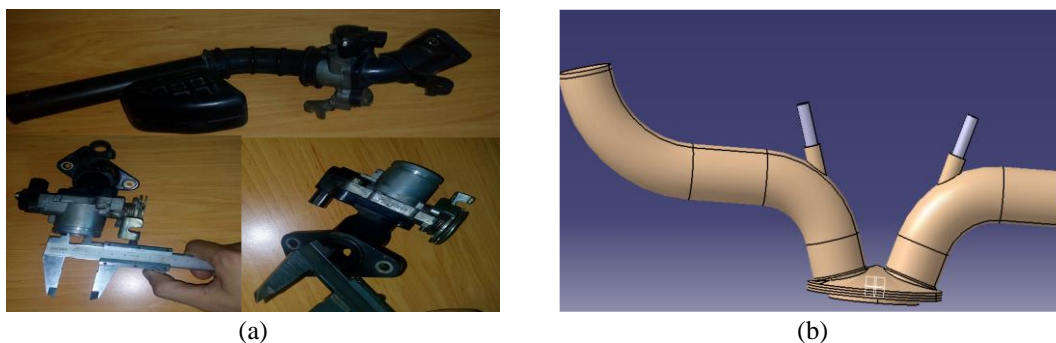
(a) Measurement of actual dimensions of the Honda 125cc engine intake manifold shape; (b) CATIA software for the design of the intake manifold of an engine;
